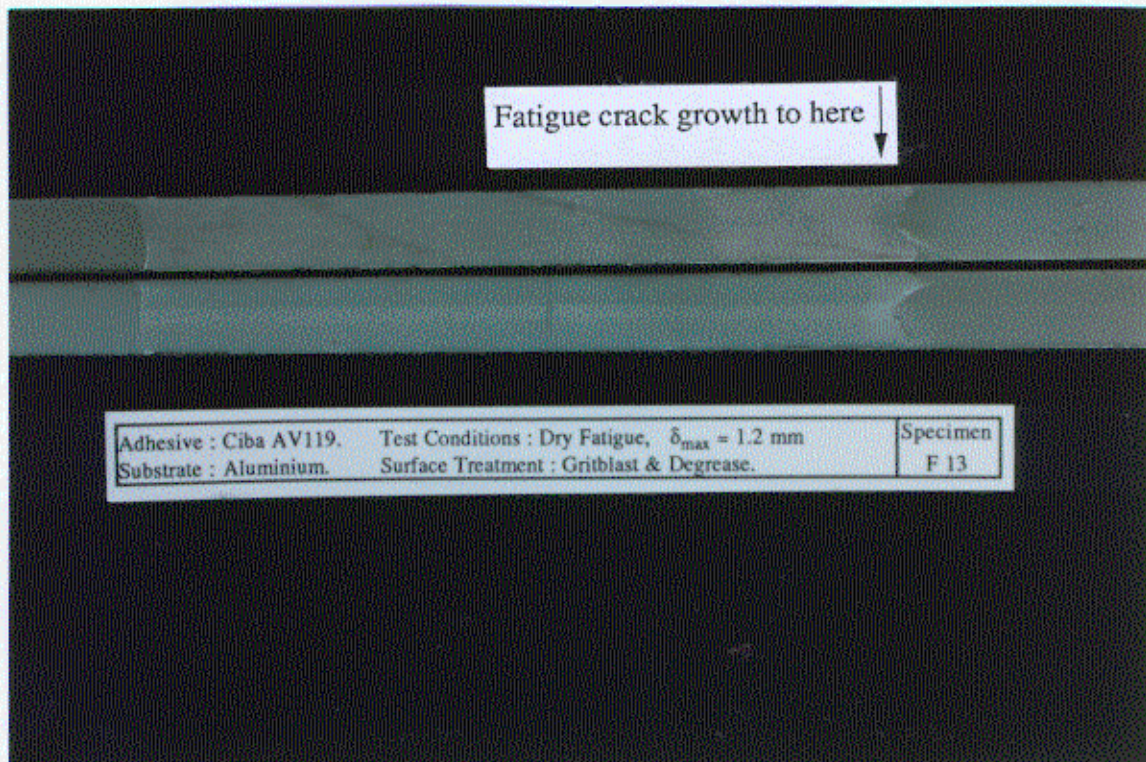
Fracture surface of aluminium alloy specimen bonded with 'AV119', gritblast & degrease surface treatment, tested 'dry', showing apparently interfacial failure.
